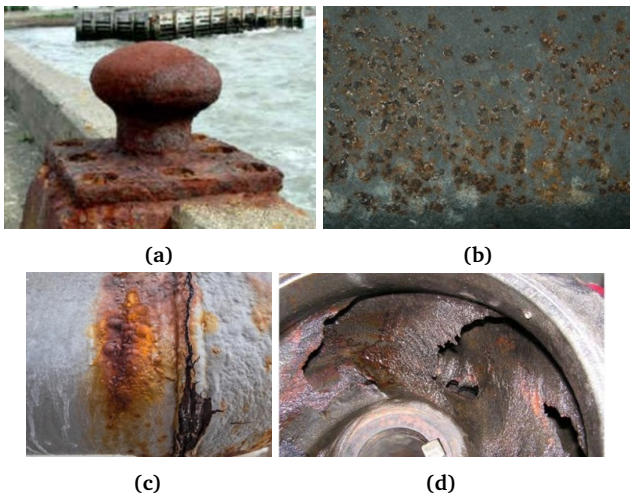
(a) Uniform Corrosion, (b) Pitting Corrosion, (c) Stress Corrosion Cracking, (d) Erosion Corrosion.
